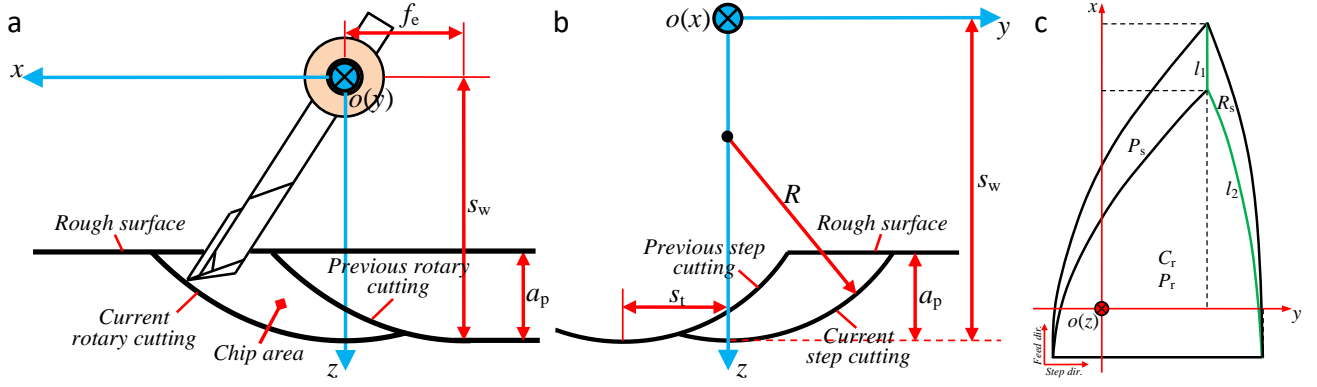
Schematic of cutting mechanism of UPRFC in (a) side view and (b) back view, and (c) chip formation
